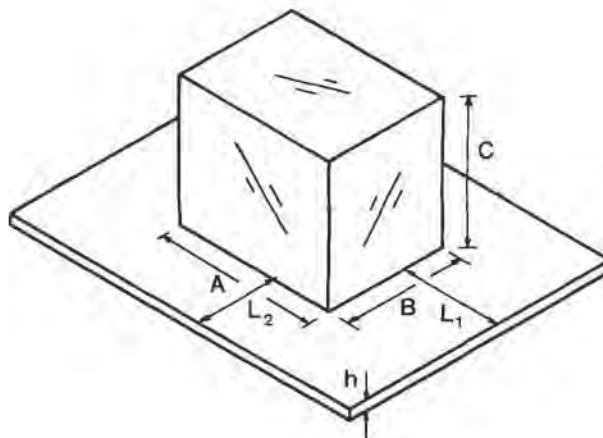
Part, rim and edge material layout for heavy-gage thermoforming
